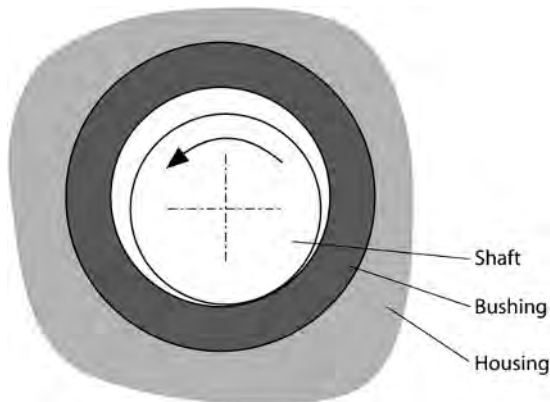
In a sliding bearing the moving shaft is supported by a bearing bushing fixed to the stationary housing.
